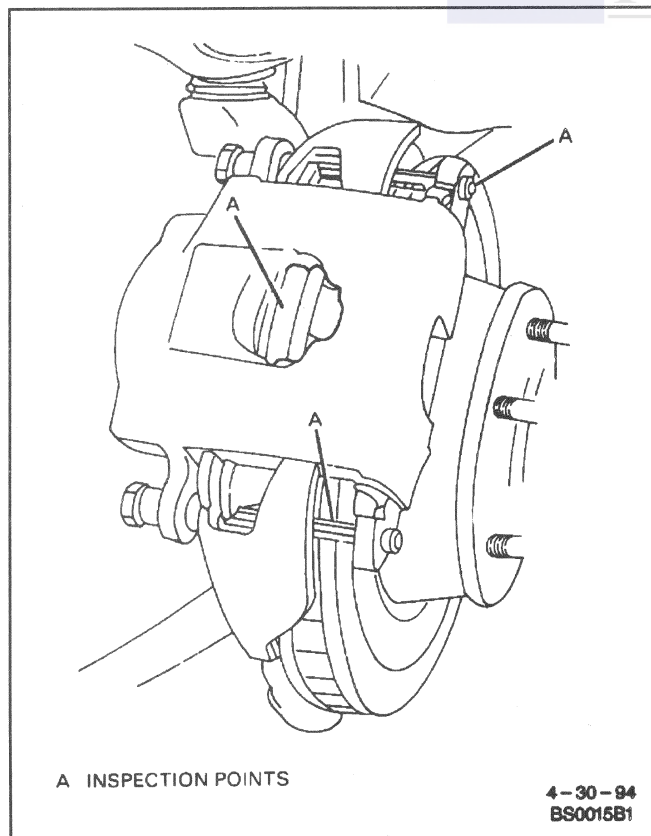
Front Disc Brake Inner and Outer Pads Inspection
